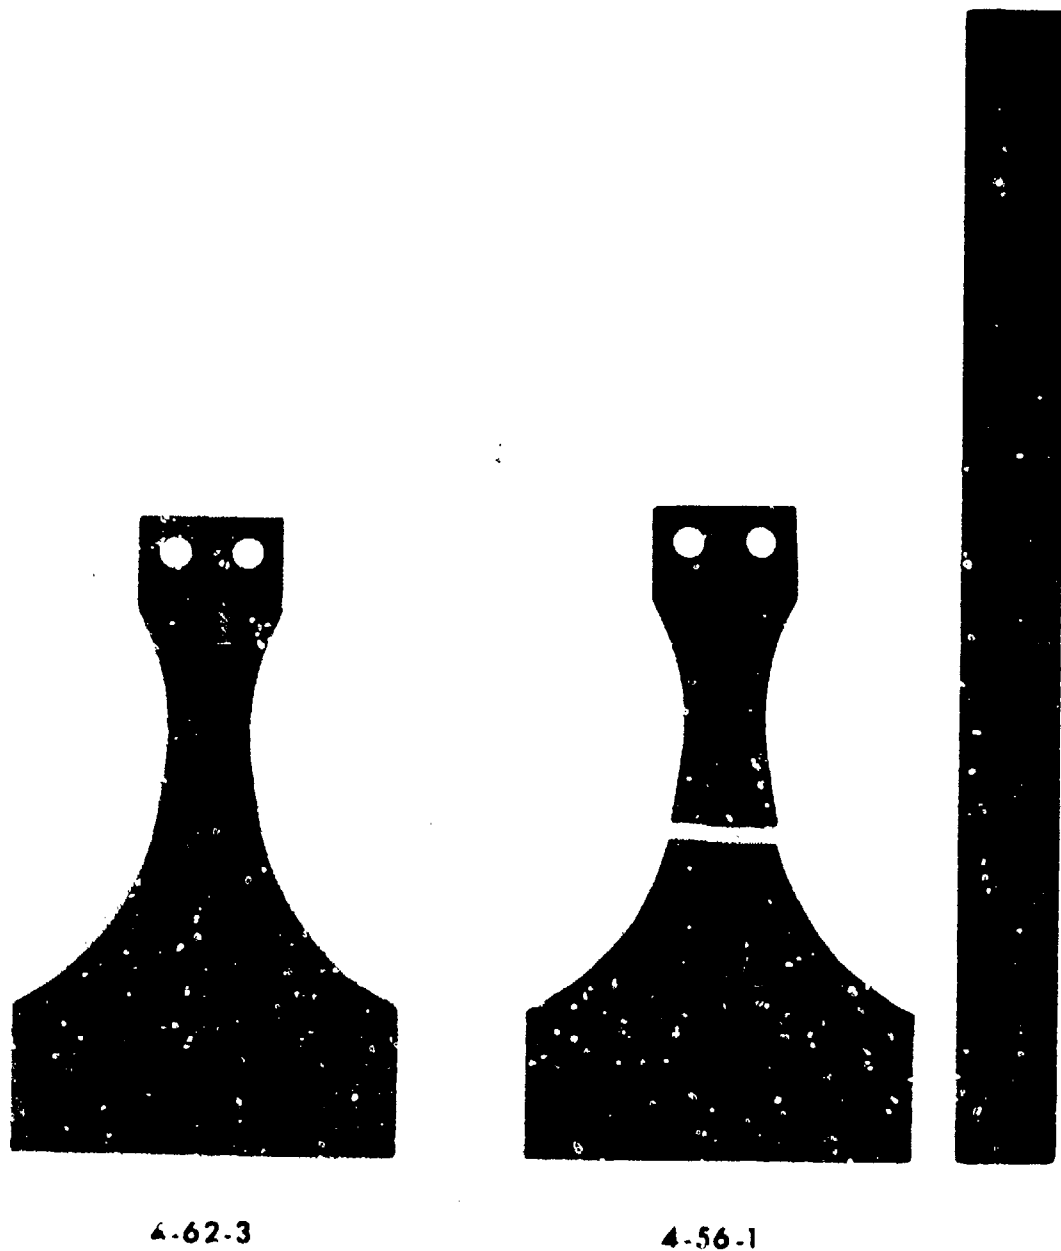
Typical 1/8-In. (3.2mm) Thick Sheet Flexure Fatigue Test Specimen and Representative Failure. Specimens are ZE41 Alloy, HAF Heavy Anodic Coated (C5).
